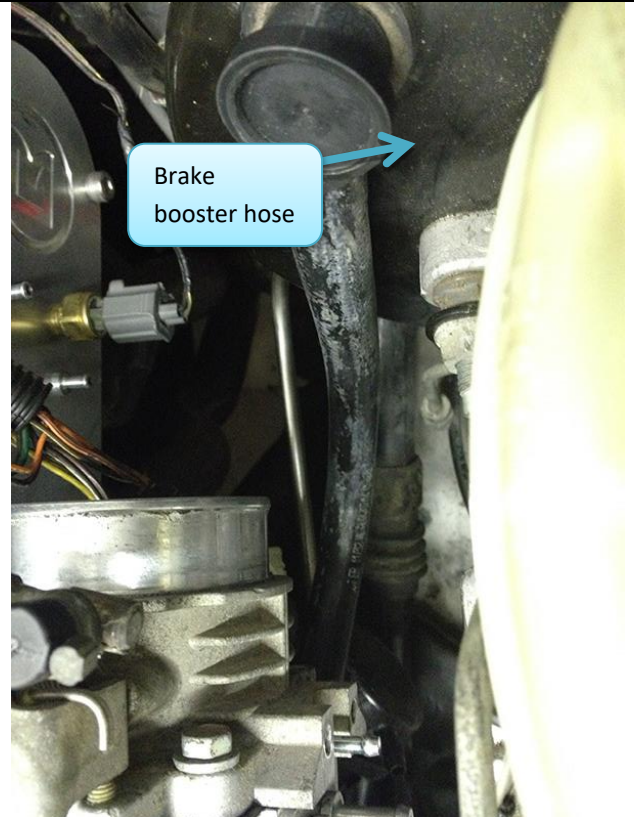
Brake booster vacuum hose installed to bottom of throttle body.
